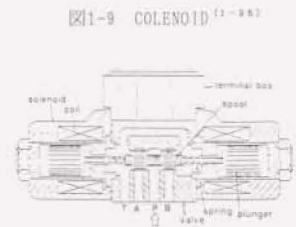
Schematic and Cross-sectional Drawing of the Colenoide Valve
